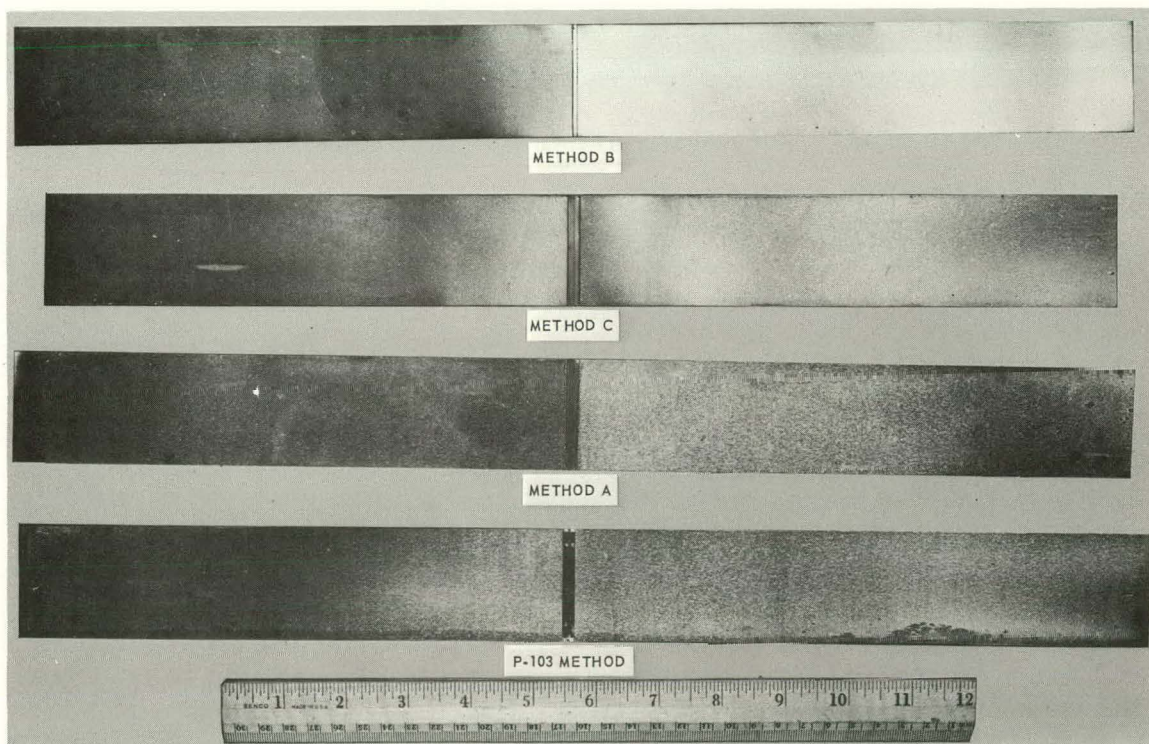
Tensile specimens incorporating brazed joints made by the four ring joining techniques (Neg. P62-6-33D)
